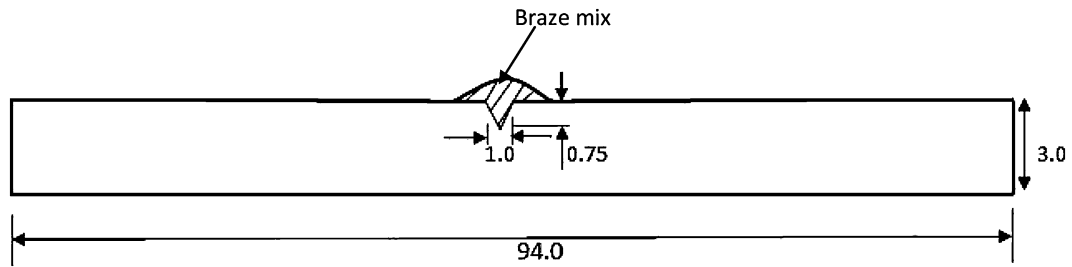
Schematic of the surface deposition wide-gap brazement specimen (all dimensions in mm).
